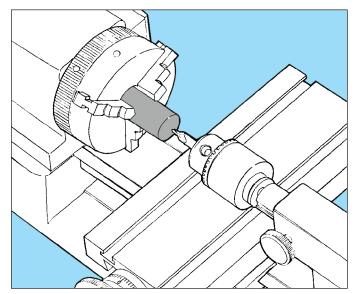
Tailstock center drilling. The work turns while the drill is held stationary in the tailstock.
